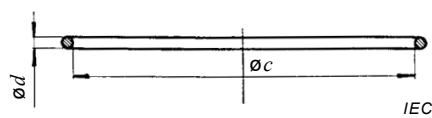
Flange type A: 60154 IEC-AR 58-70 gasket
